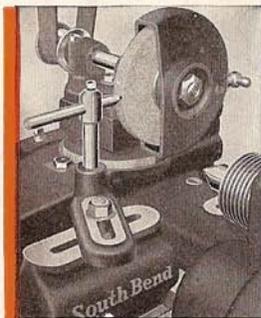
Truing a Grinding Wheel with Diamond Dresser
